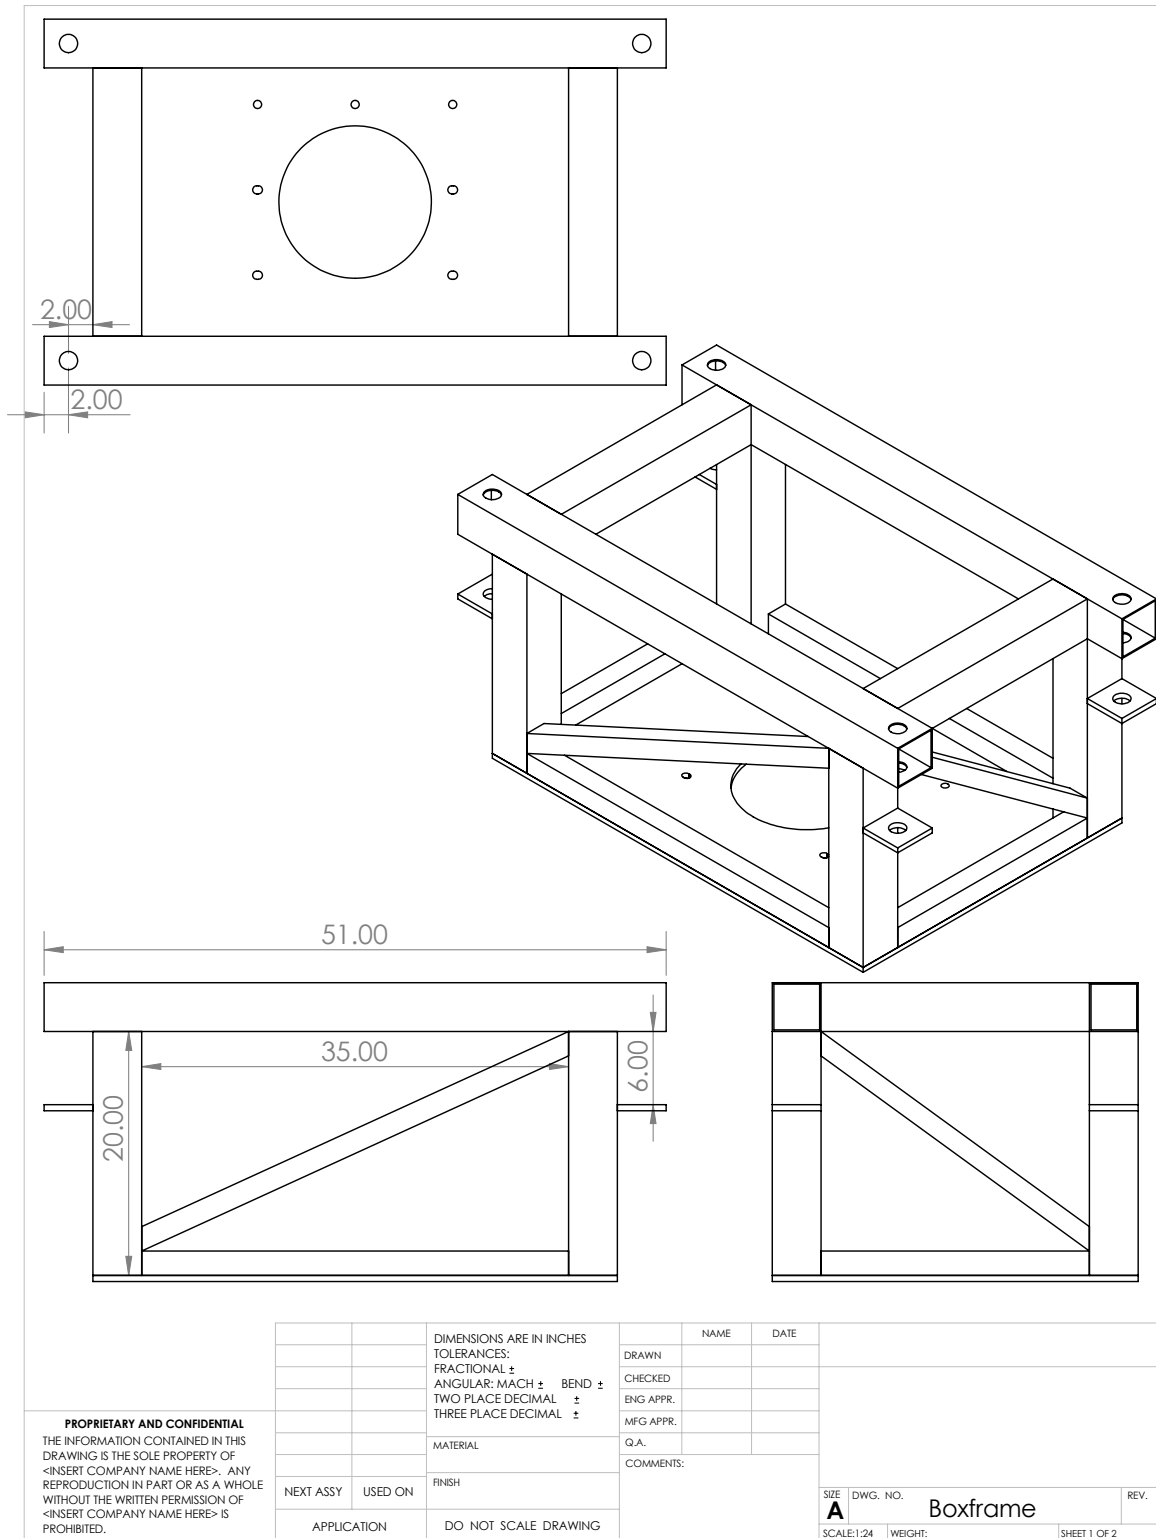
Steel box frame used to mount hydrofoil onto towing-tank carriage. Dimensions are in inches.
